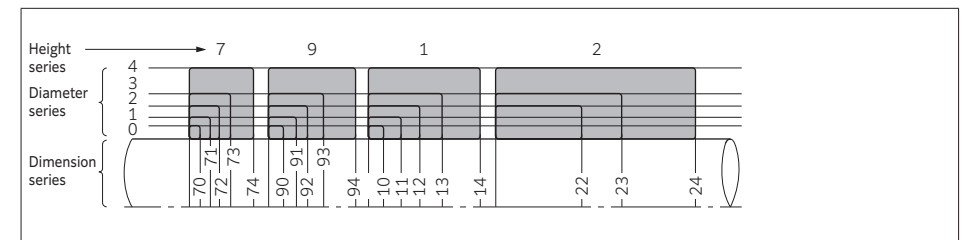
Dimension series for thrust bearings (excluding diameter series 5)
